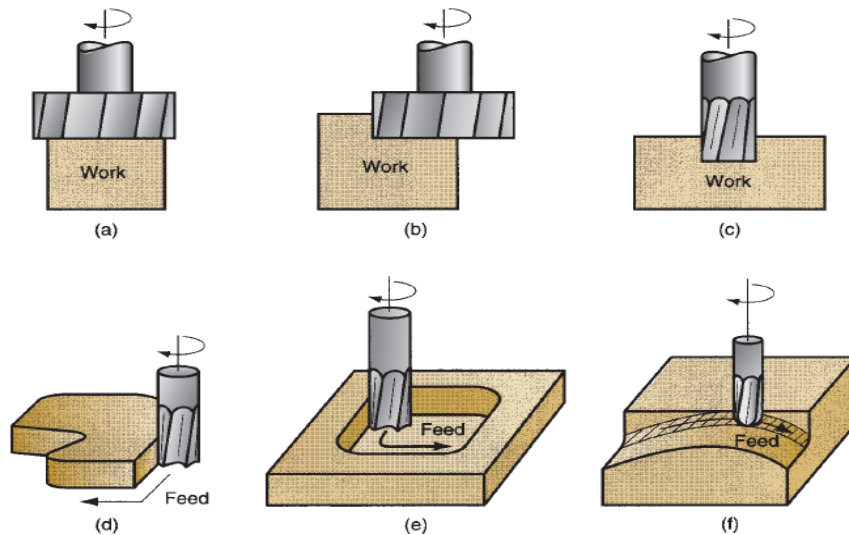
Face milling: (a) conventional face milling, (b) partial face milling, (c) end milling, (d) profile milling, (e) pocket milling, and (f) surface contouring
